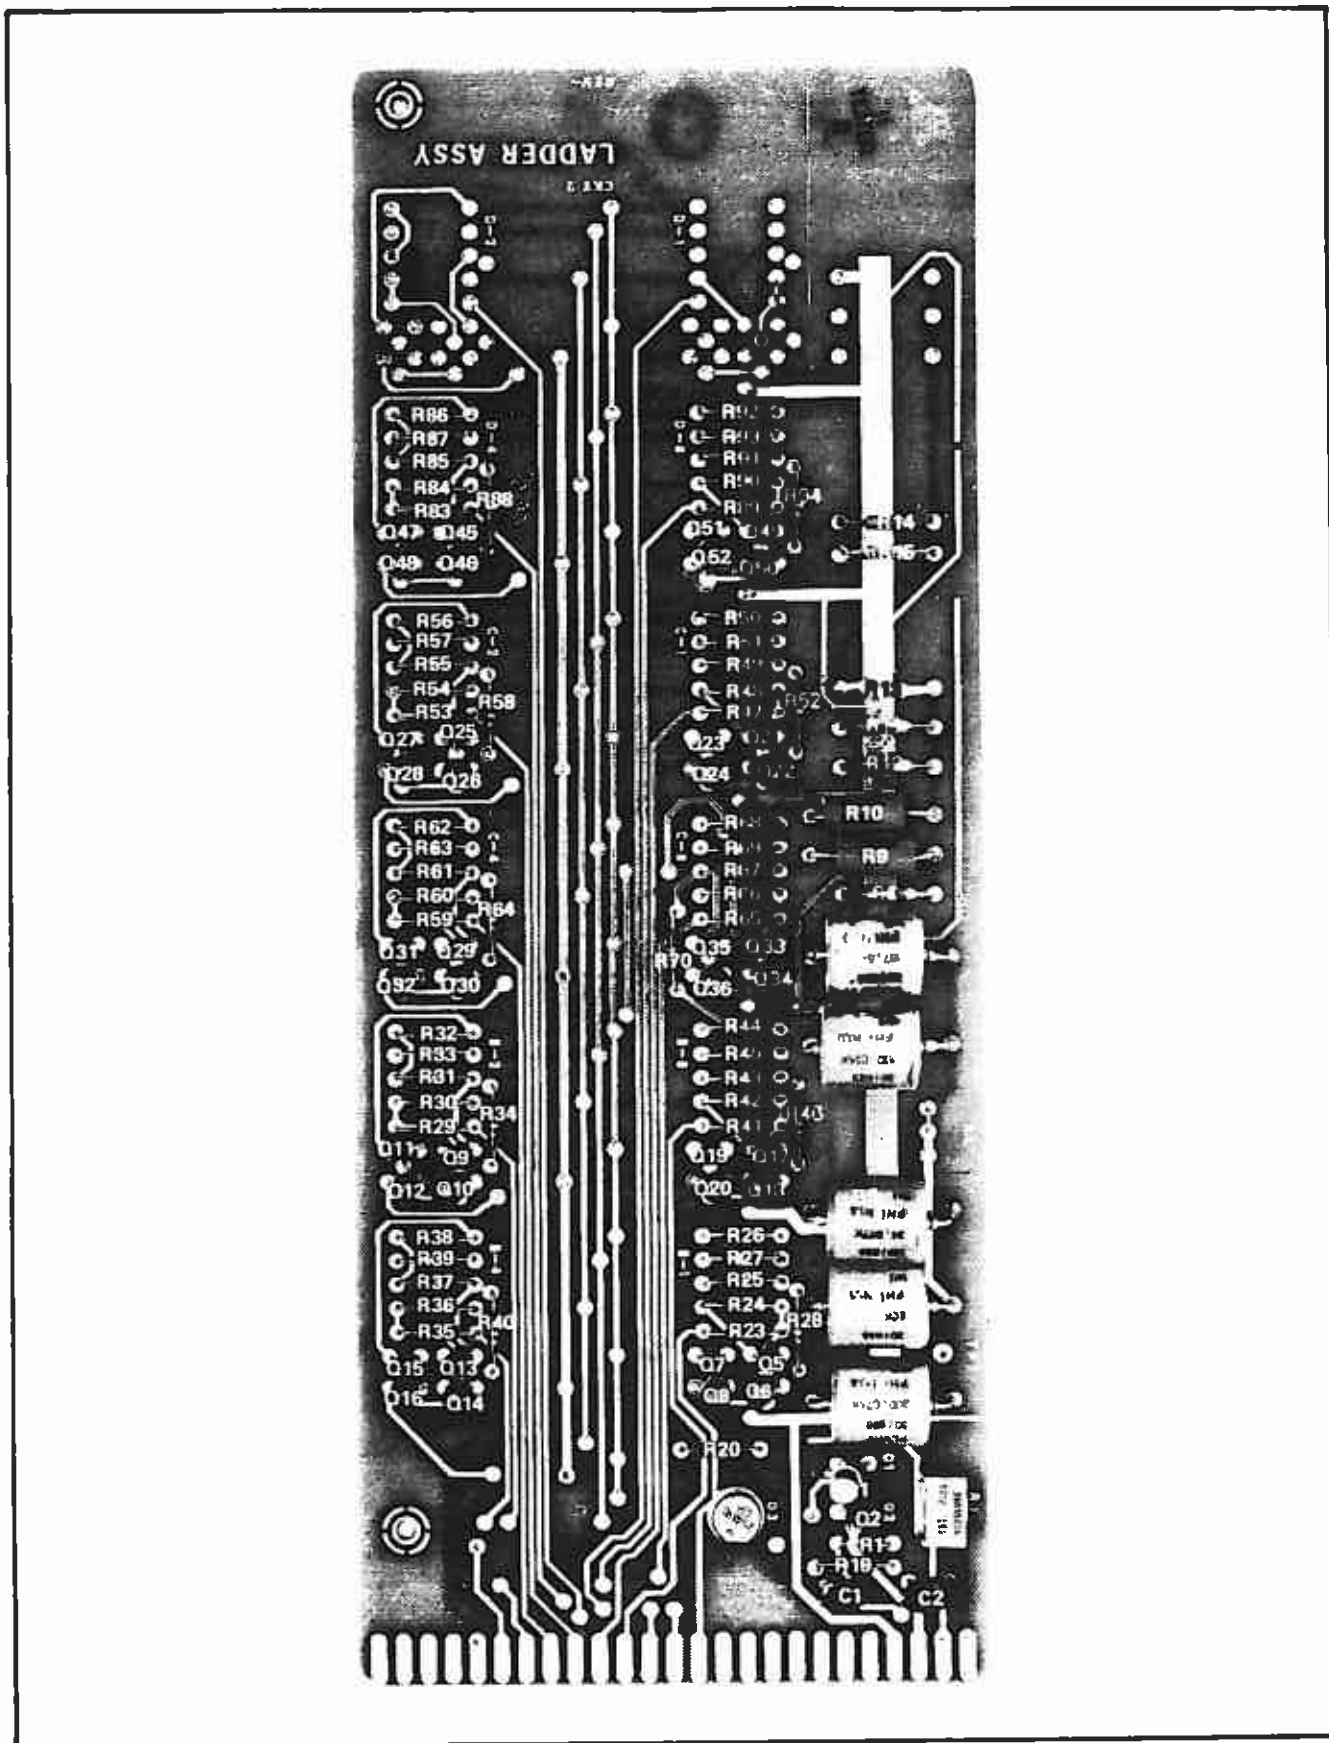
BINARY LADDER PCB ASSEMBLY
